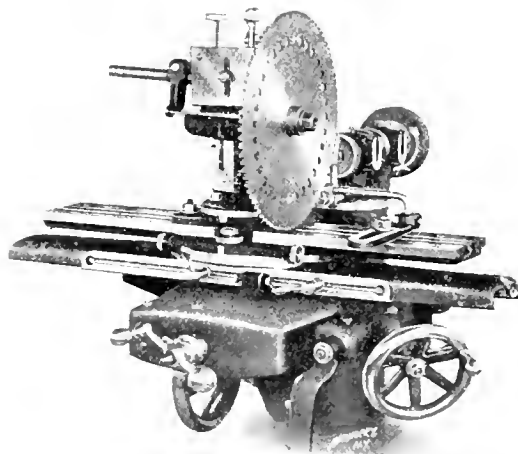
Grinding a 16-inch Saw held in Universal Attachment
